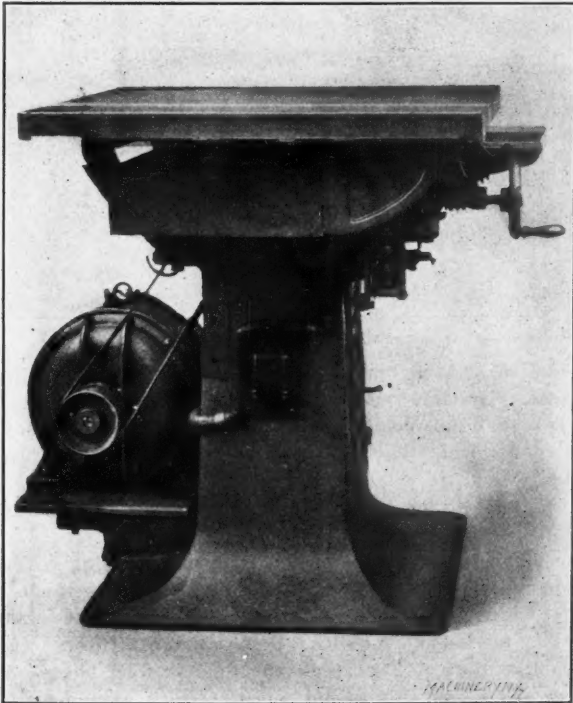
Saw for Trimming Electrotypes, with Enclosed Wiring
